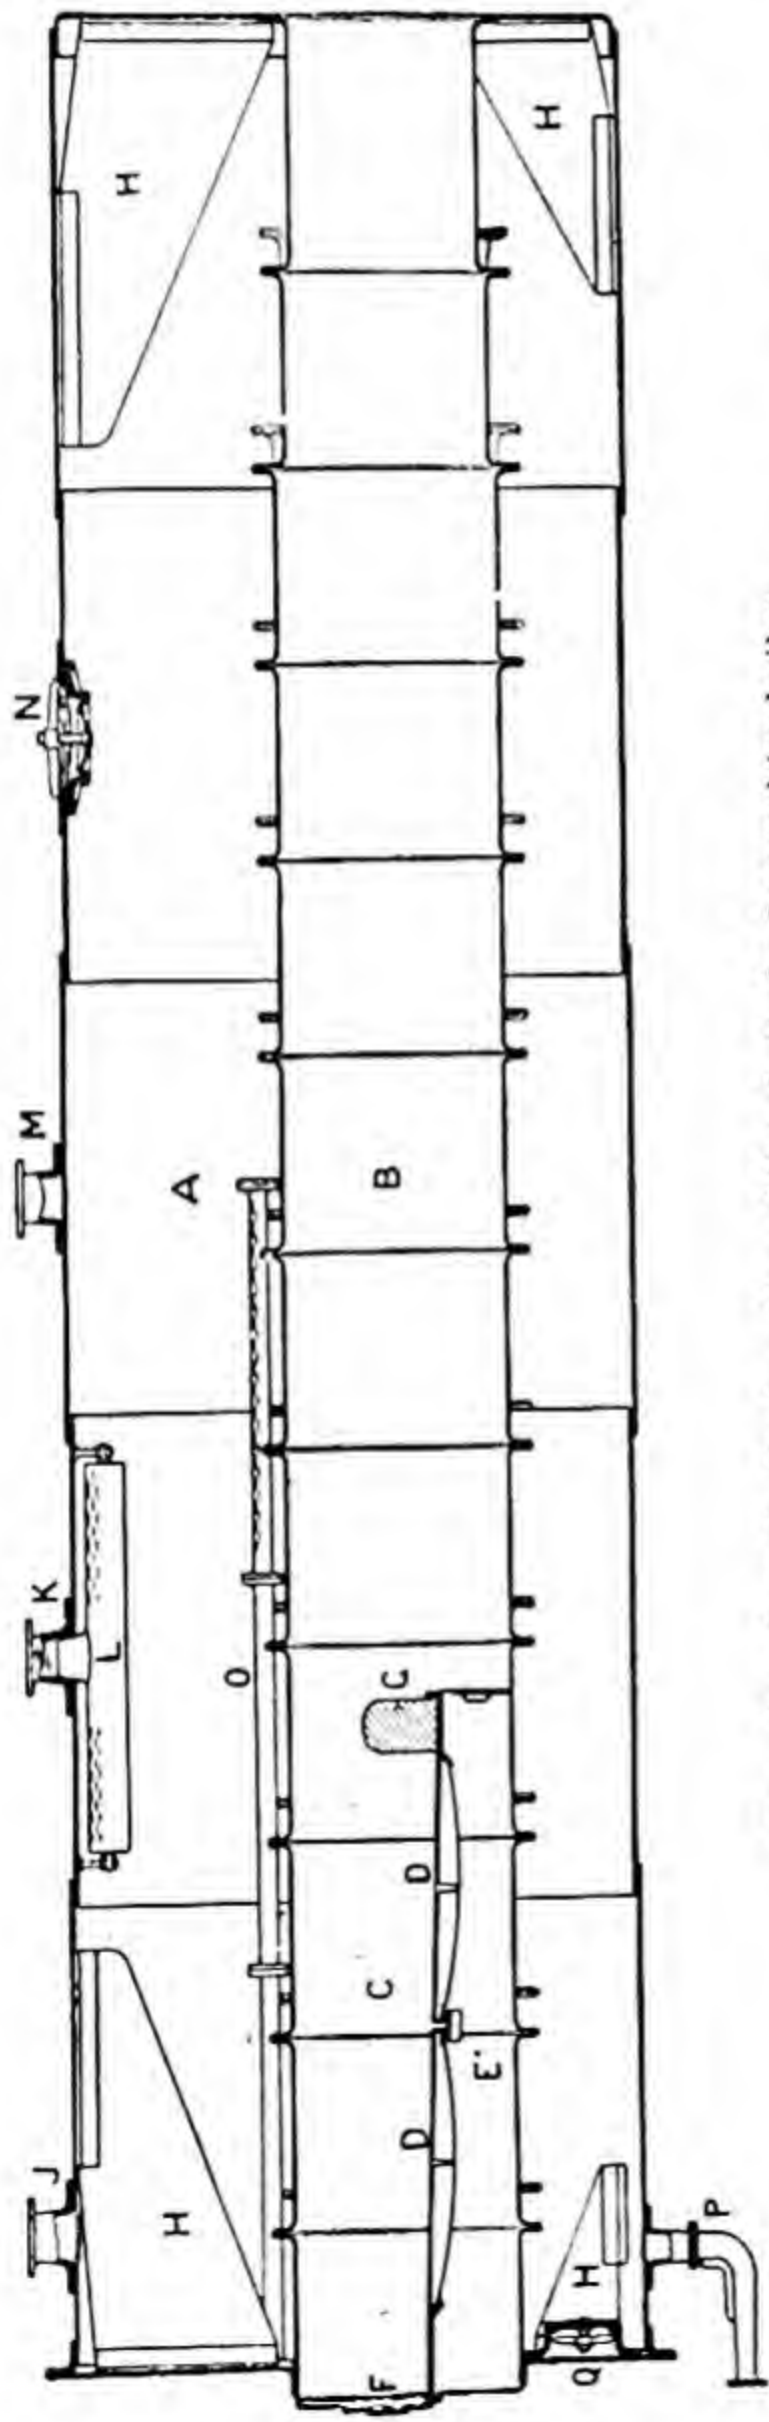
Longitudinal section of the shell of a Lancashire boiler.
